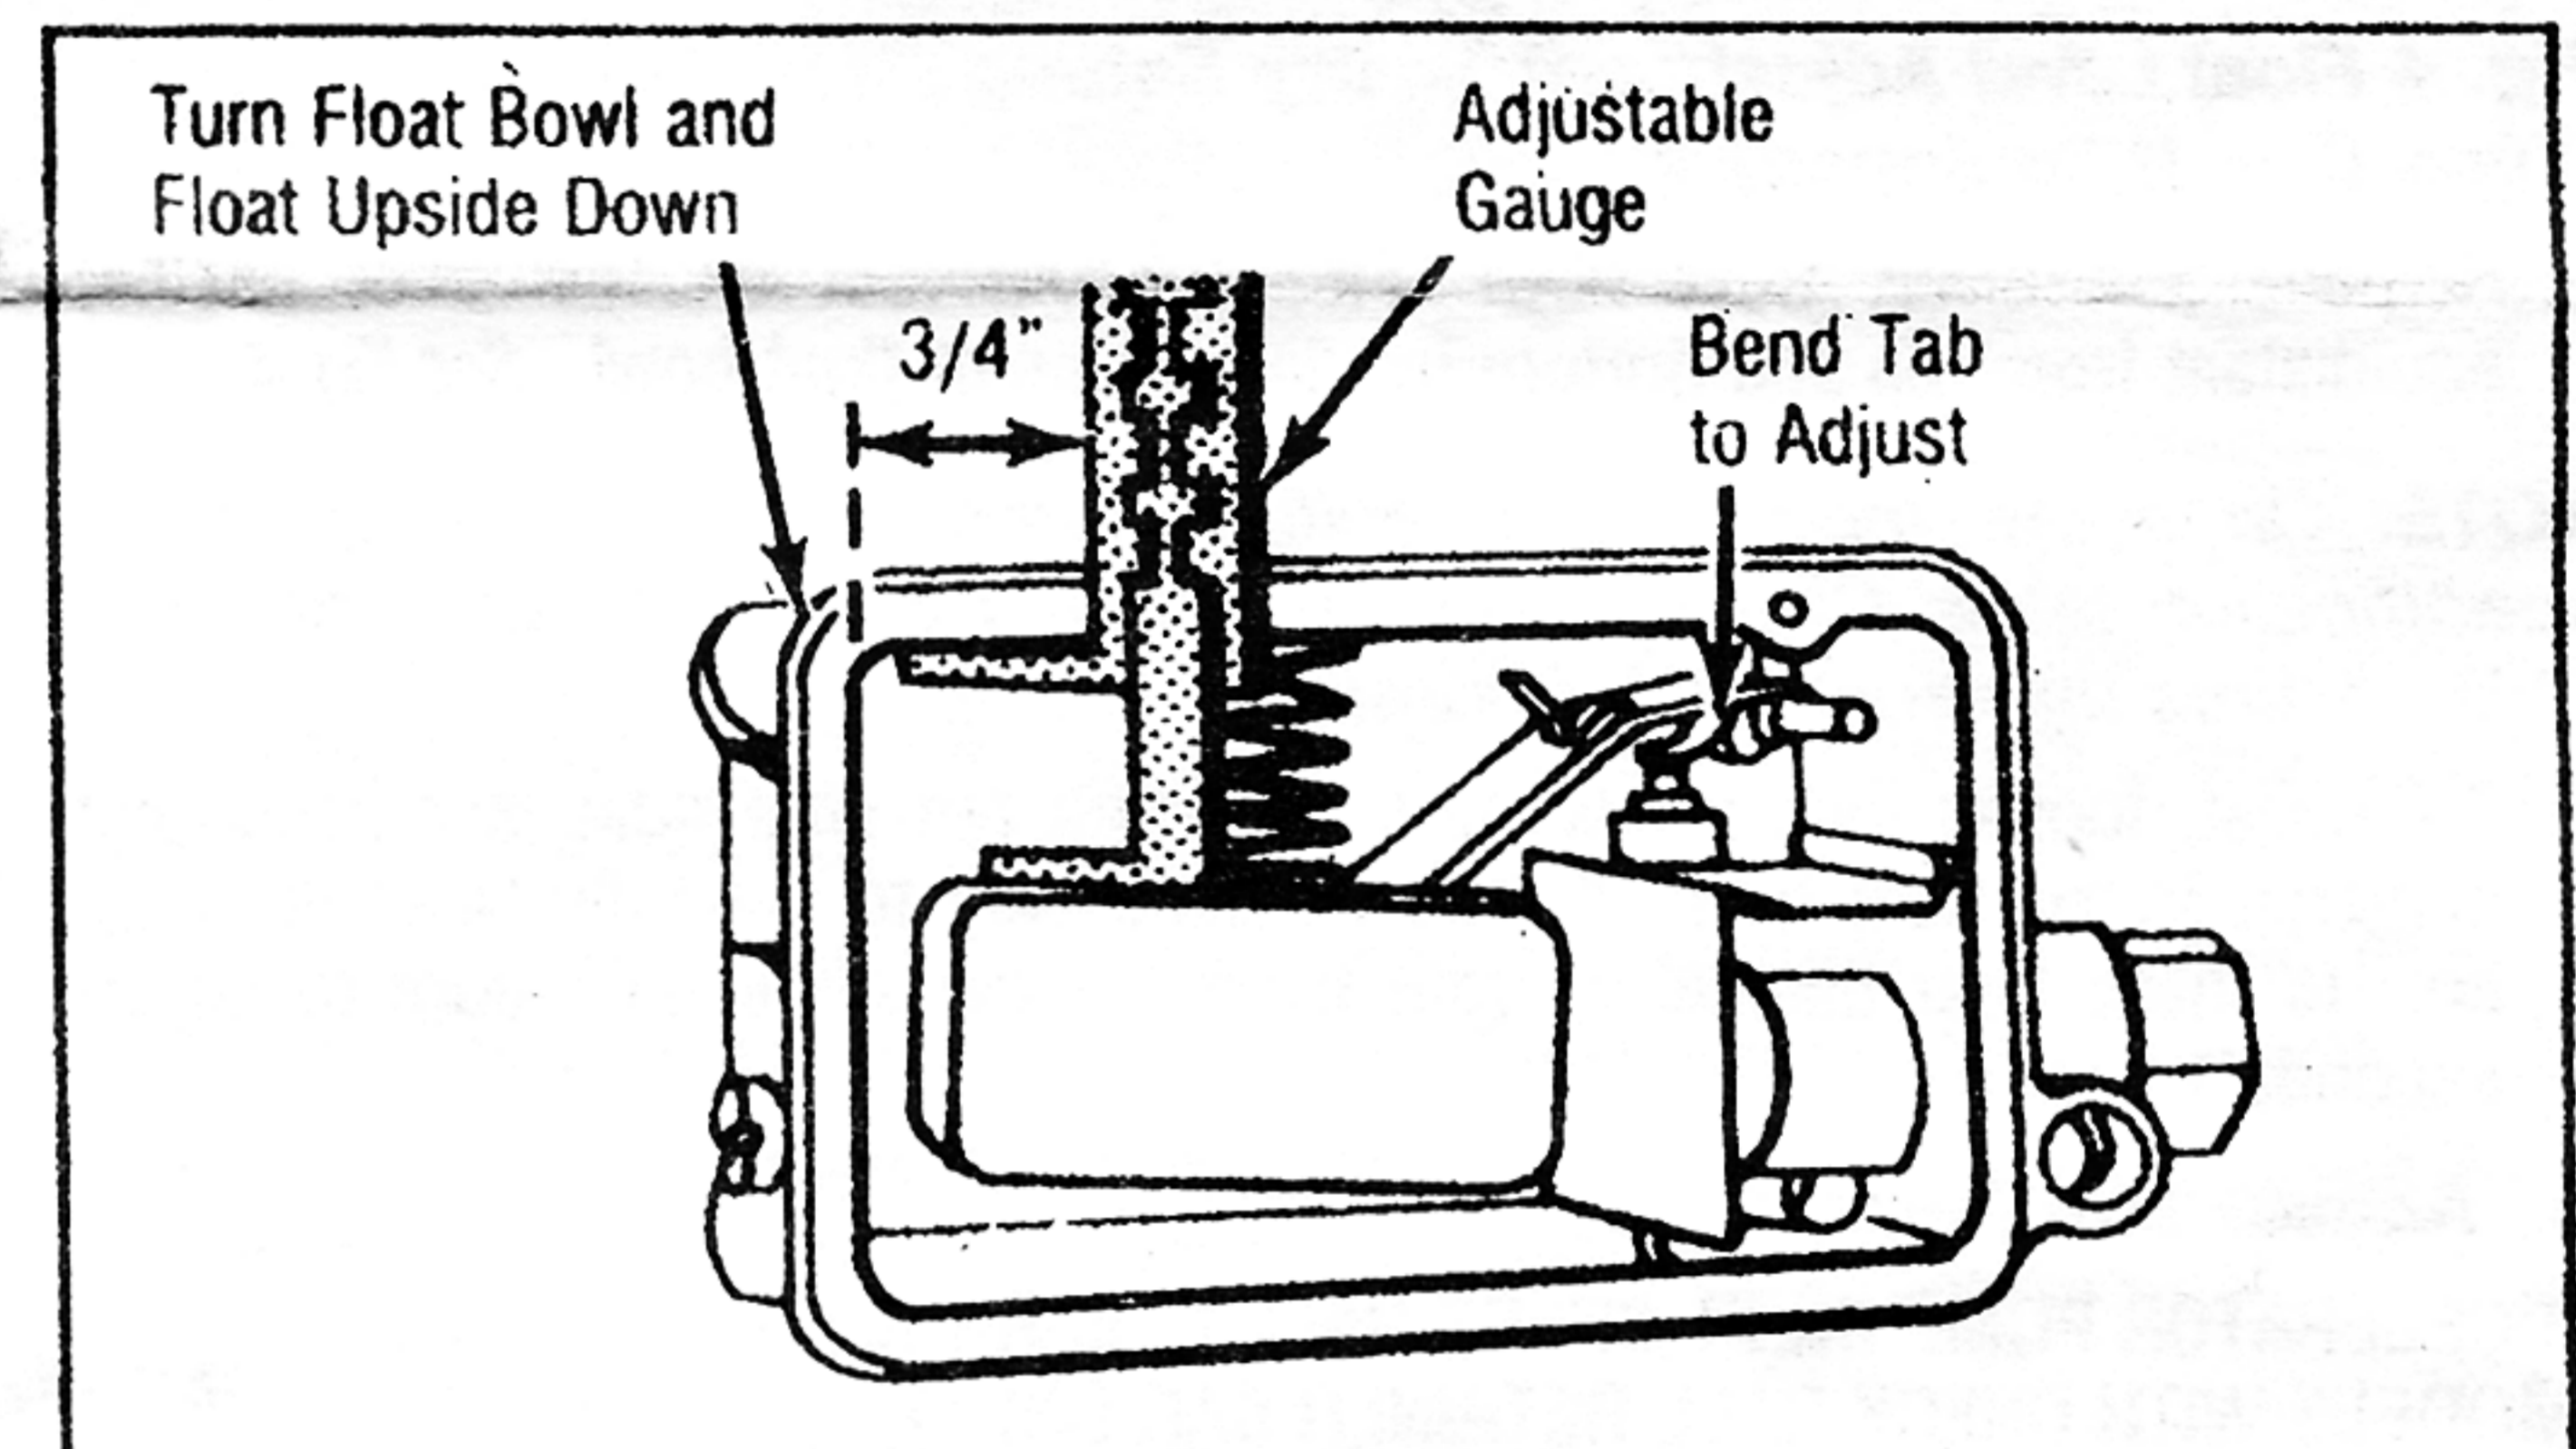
Float Level Adjustment - Dry Setting (Type A - If Equipped)
